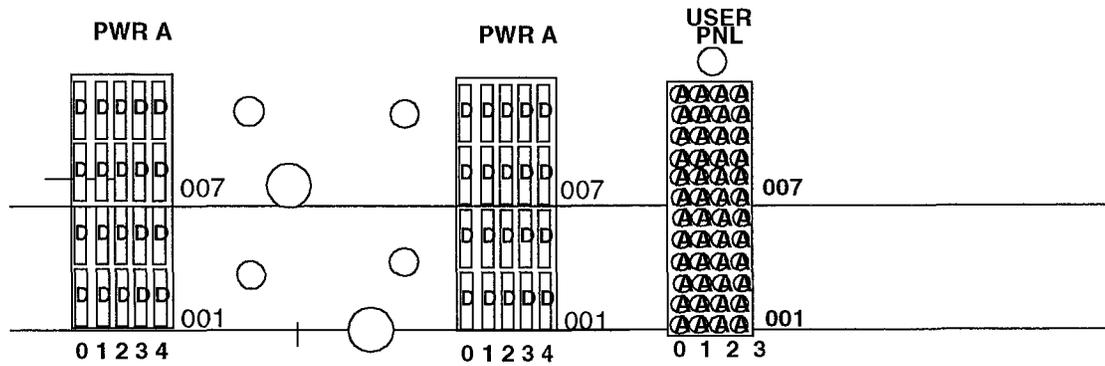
Optical Translator - Power and User Panel - Component Side View
